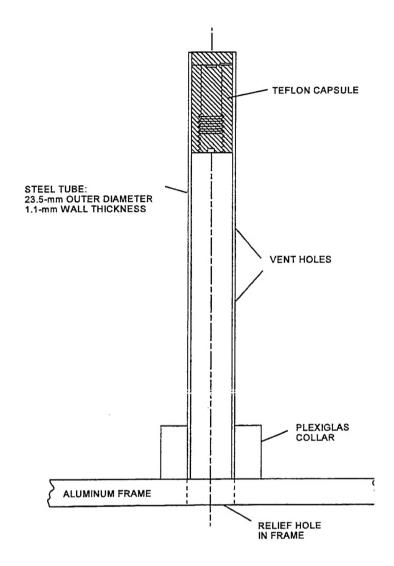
CAPSULE HOLDER ARRANGEMENT
